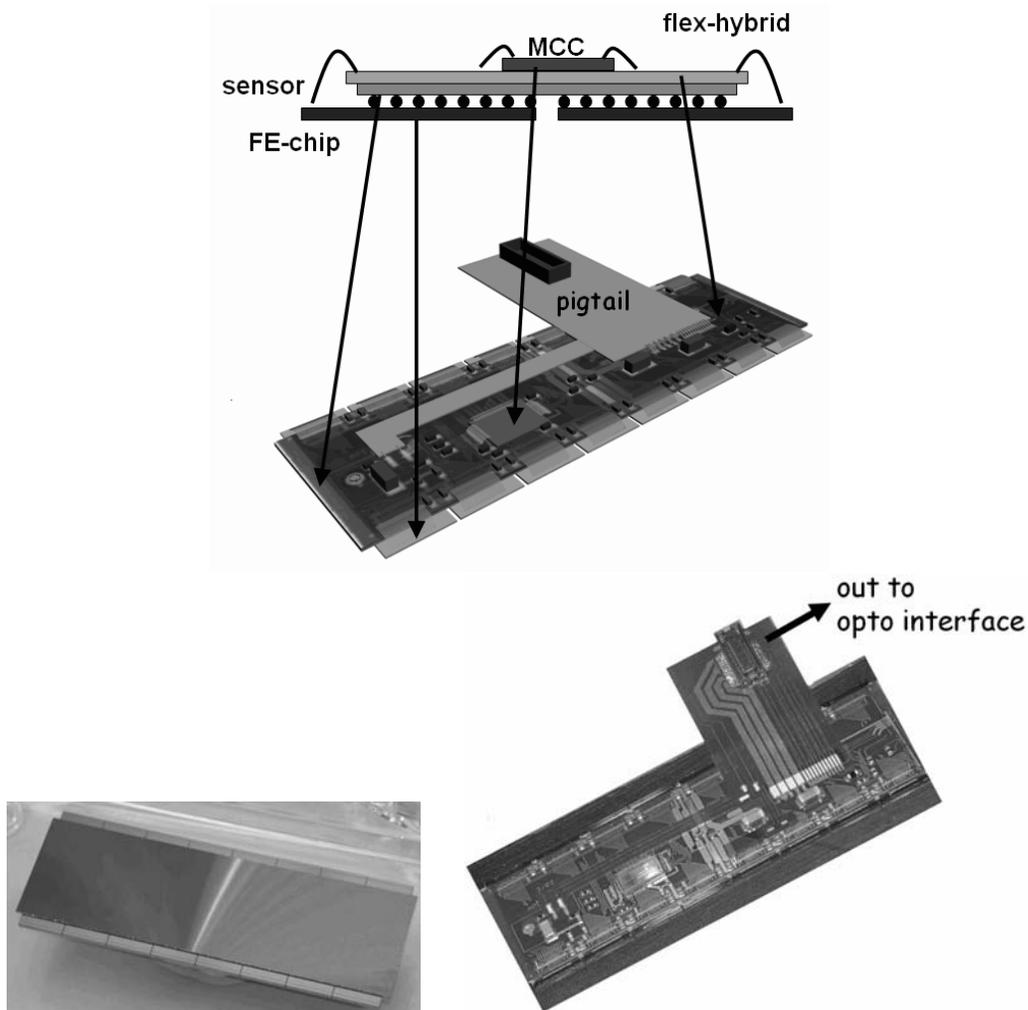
The barrel pixel module. (top) overview, showing the components of the module assembly: sensor, FE-chips, Flex-kapton-hybrid, module control chip (MCC), pigtail. (b) photograph of a bare module, (c) photograph of a fully assembled module.
